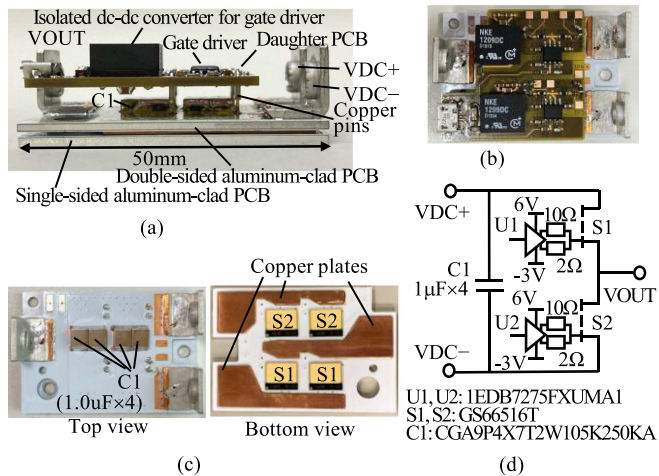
Photograph and schematics of the proposed power module prototype. (a) Side view. (b) Top view. (c) Double-sided aluminum-clad PCB. (d) Circuit schematics.
